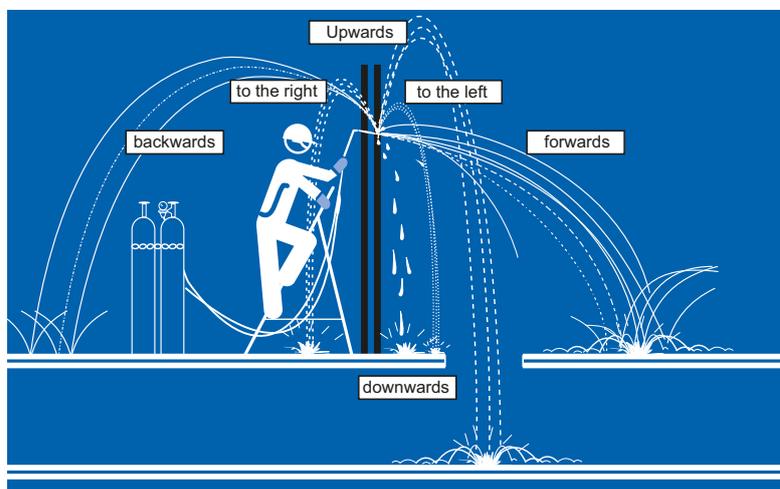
Dispersal pattern of hot particles during welding work
